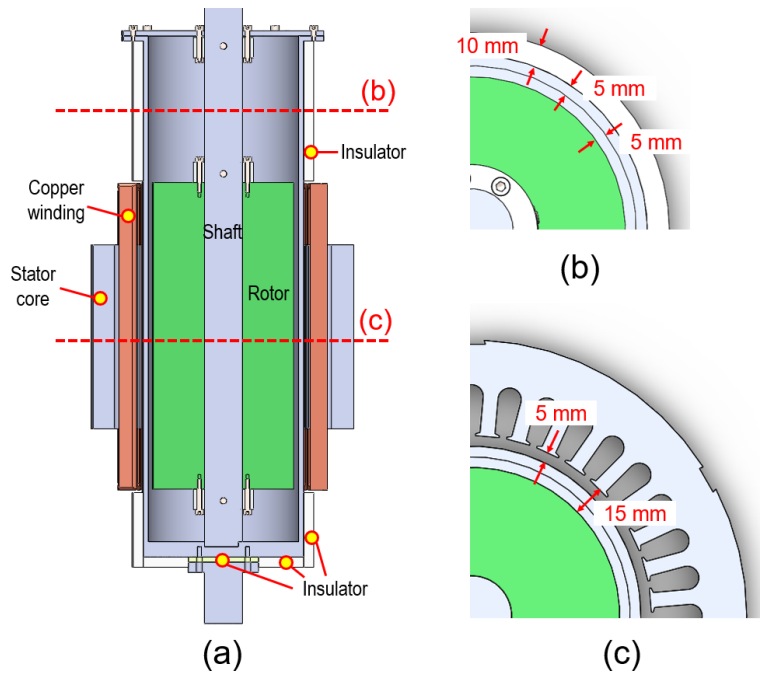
Concept of LN₂ chamber for test motor. (a) Front cross-sectional view, (b) Cross-sectional view at the upper part, and (c) Cross-sectional view at the middle.
